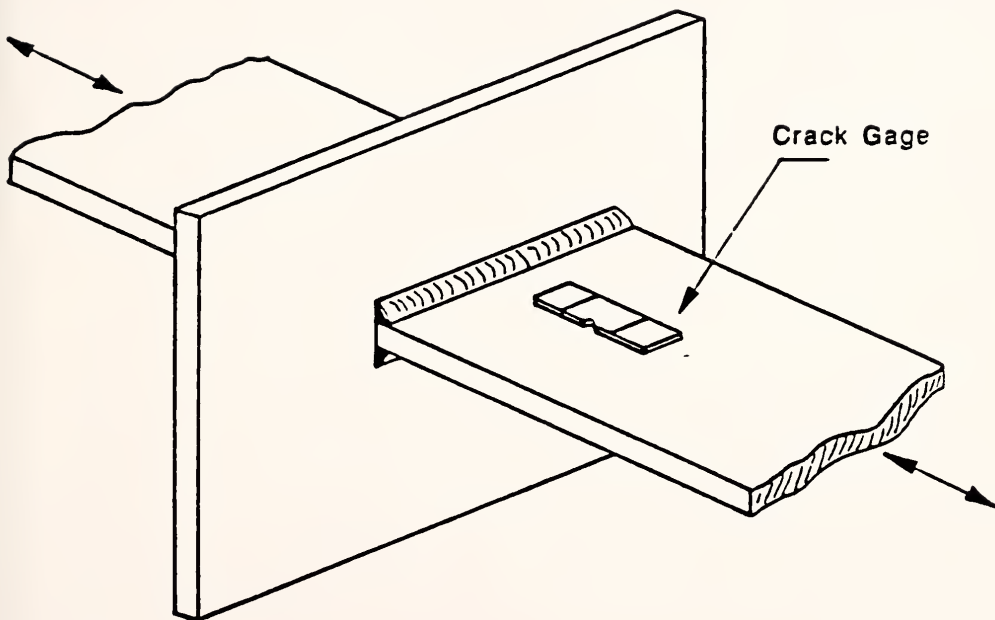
Crack Gage Placement on Fillet Welded Tee Joint
